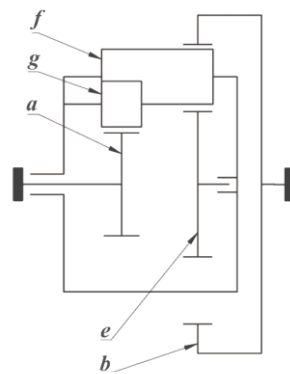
Scheme of Ravigneaux planetary gear set, a- first central gear, g, f – satellites, e - second central gear, b - third central gear.
